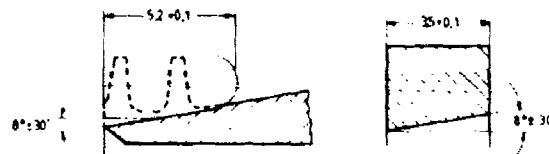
Detail of a Technical Repair Instruction for the replacement of abraded sealing fins by a high-temperature brazed piece of suitable material, final shaping by grinding
